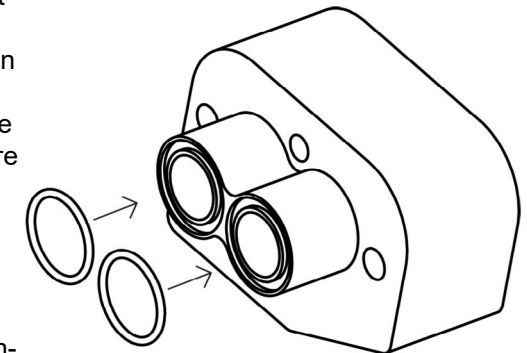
Insert the O-rings into the adapter's O-ring glands
